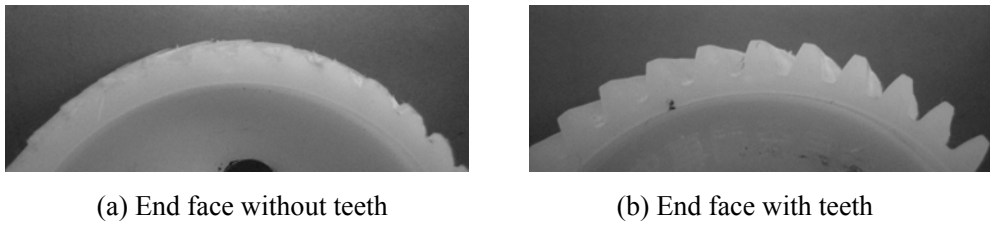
End face after damage of no lubricated plastic crossed helical gears
